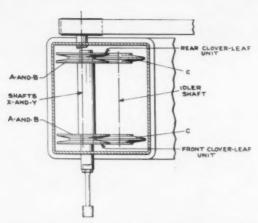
Coupled cloverleaf-type bearings assure absolutely level grinding action on any surface.
